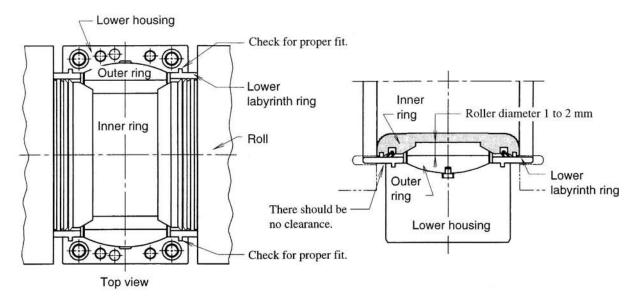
Installation of Lower Housing and Lower Labyrinth Ring
